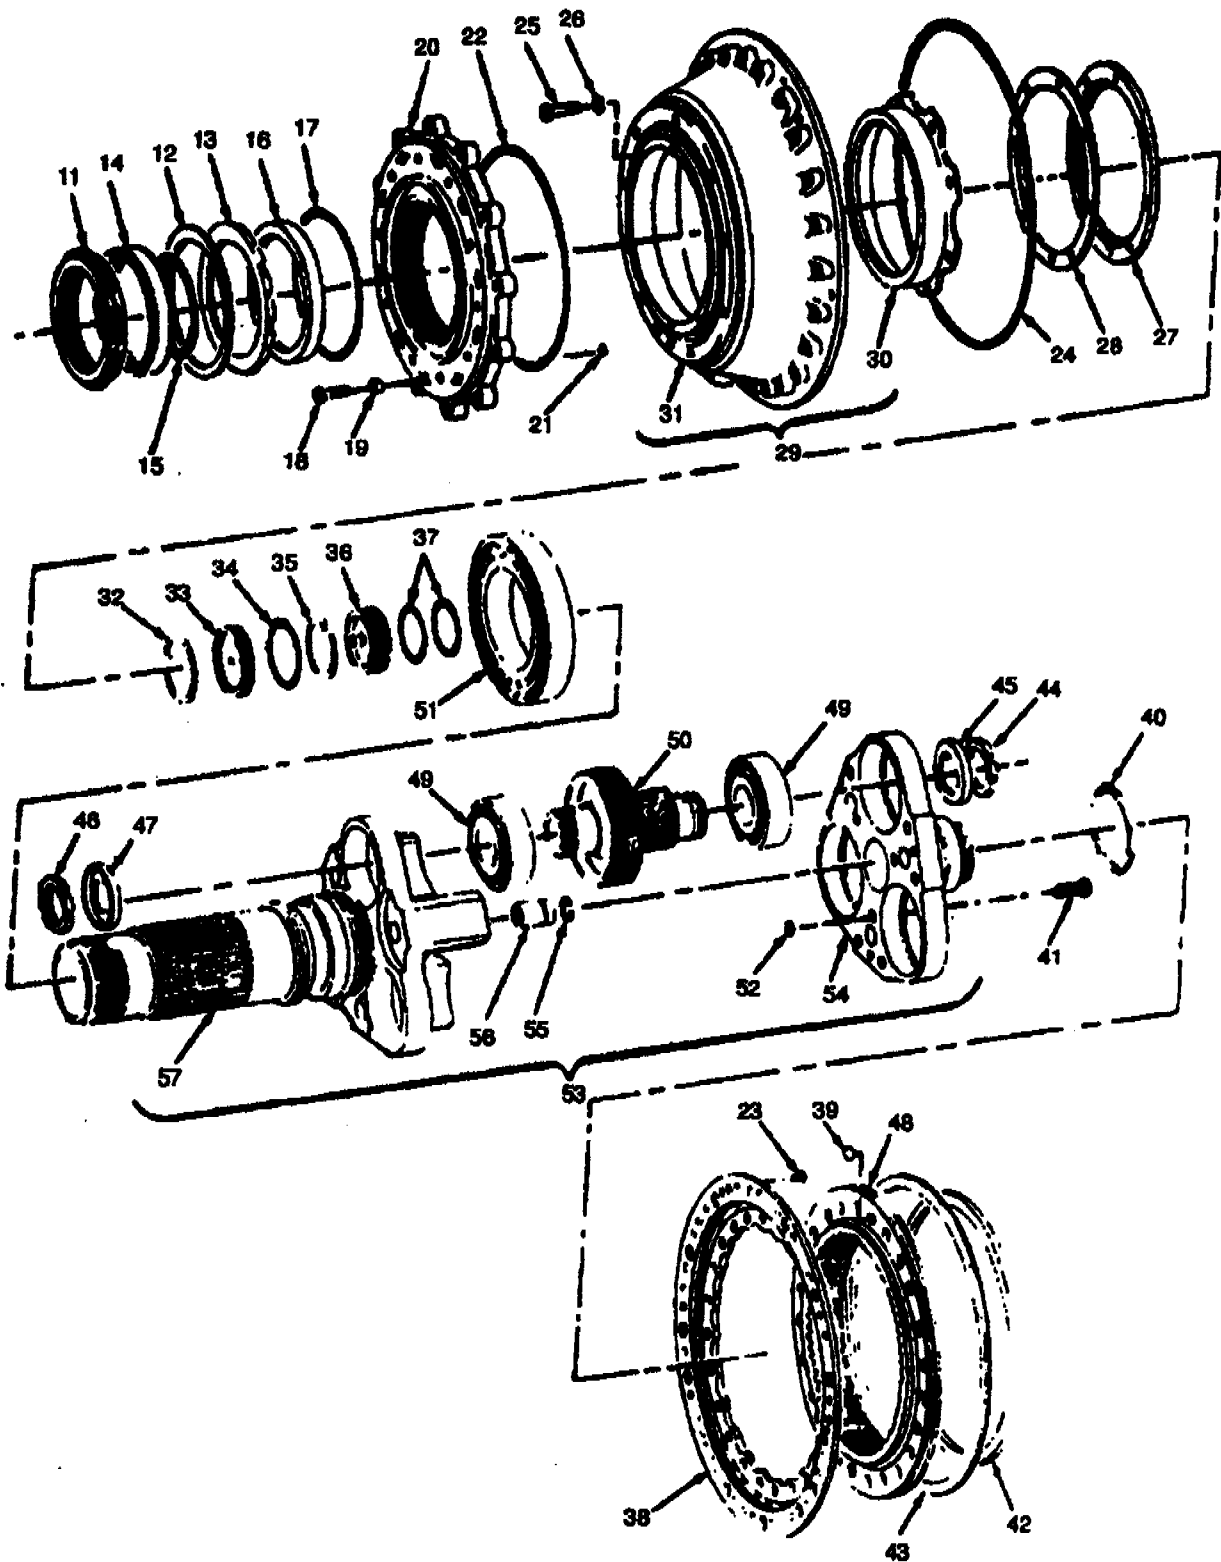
Reduction Gear Assembly (T53-L-15) (Sheet 2 of 2).
